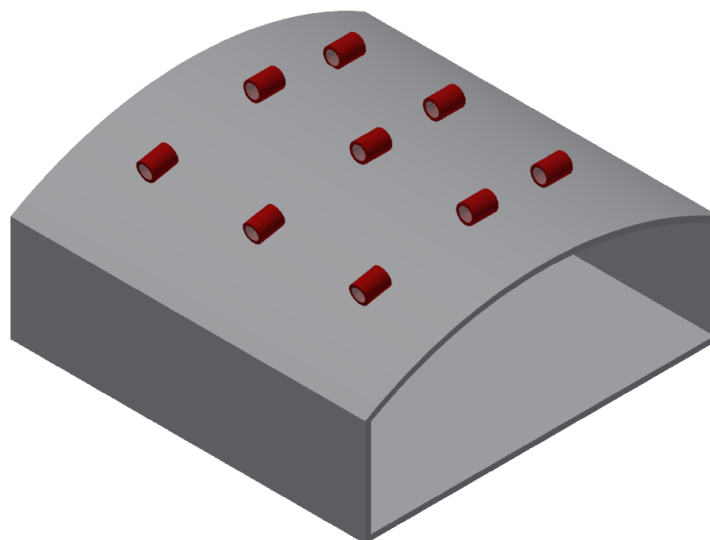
Visualisation of muffle with tubing welded to the top surface
